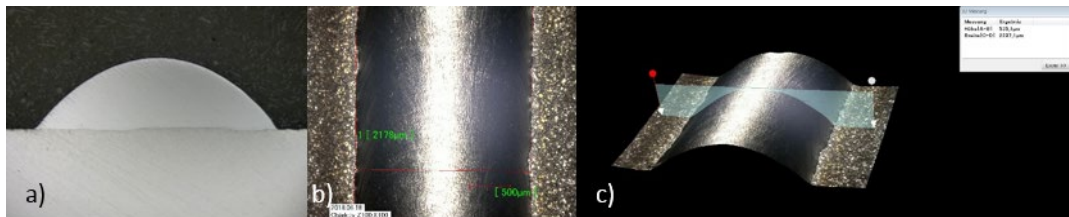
Chosen parameter set for 3-d generation ( $P=930$  W, wire feed rate 0,6 m/min,  $v=10$  mm/s) (a) cross-section image; (b) top view on deposition track; (c) 3-d image
